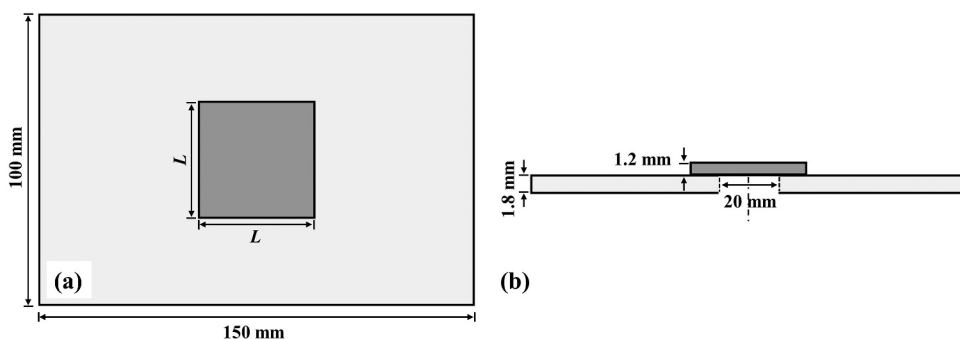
A schematic of the specimen dimensions: a) top view and b) side view.
